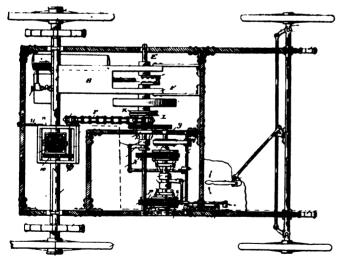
PLAN OF WINTON MOTOR-CARRIAGE.
